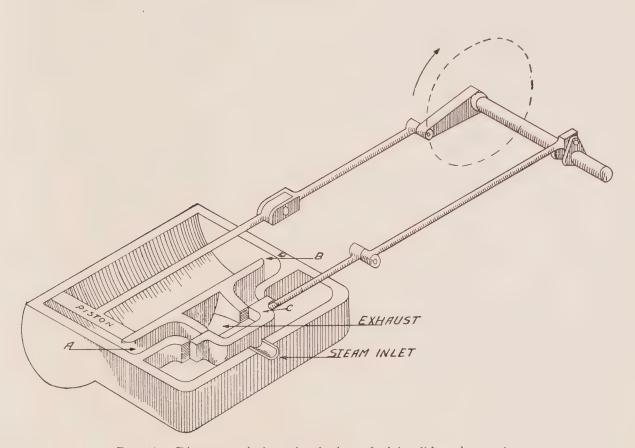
Diagrammatical sectional view of plain slide valve engine.
